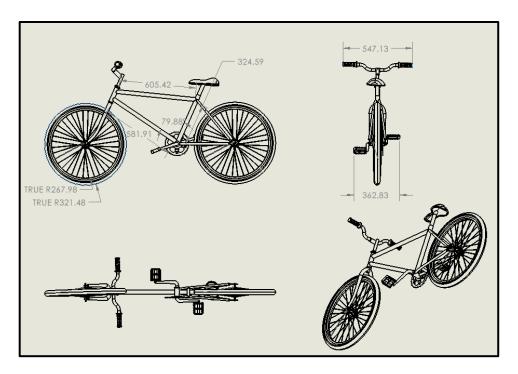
Final Bike Assembly Technical Drawing. All dimensions in mm.
